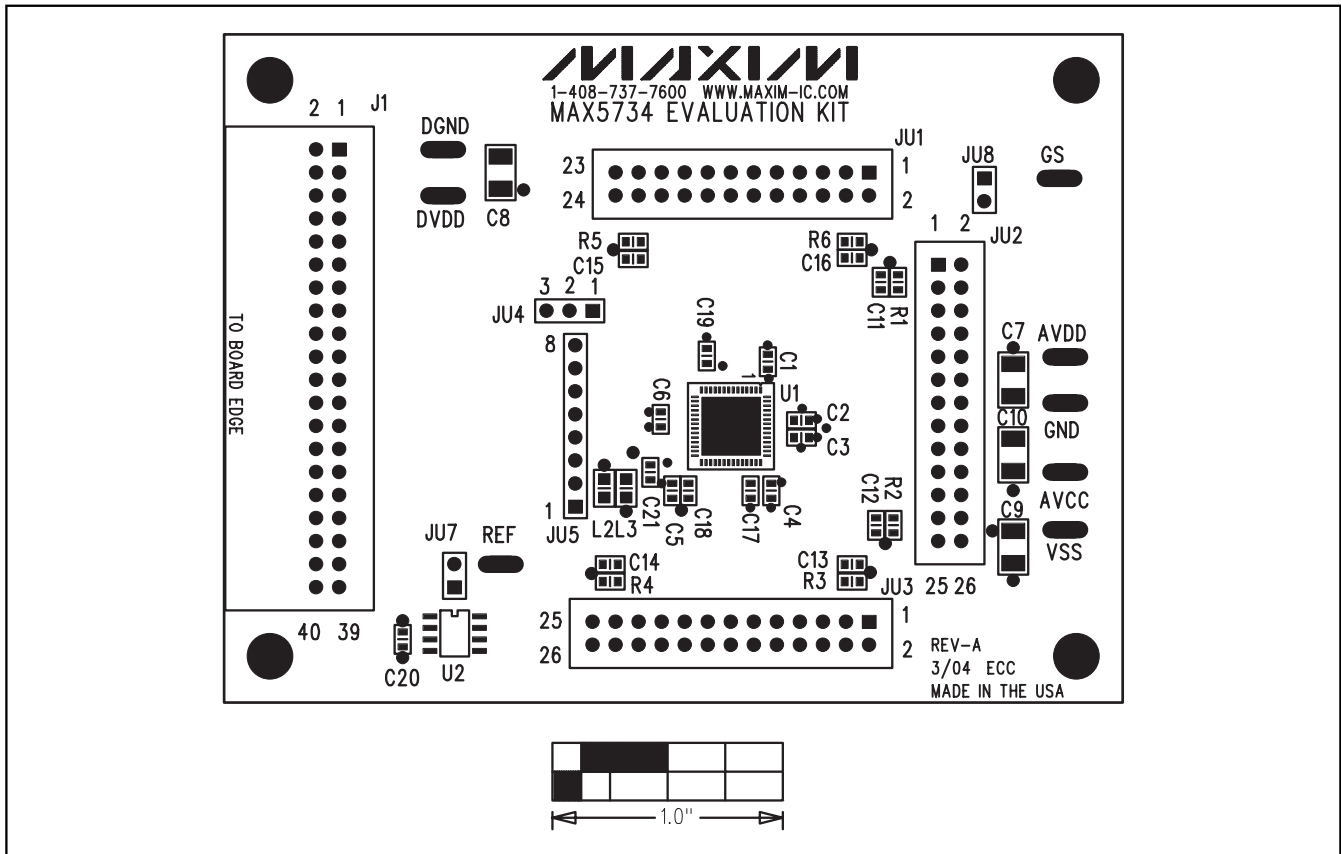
MAX5734 EV Kit Component Placement Guide—Component Side
